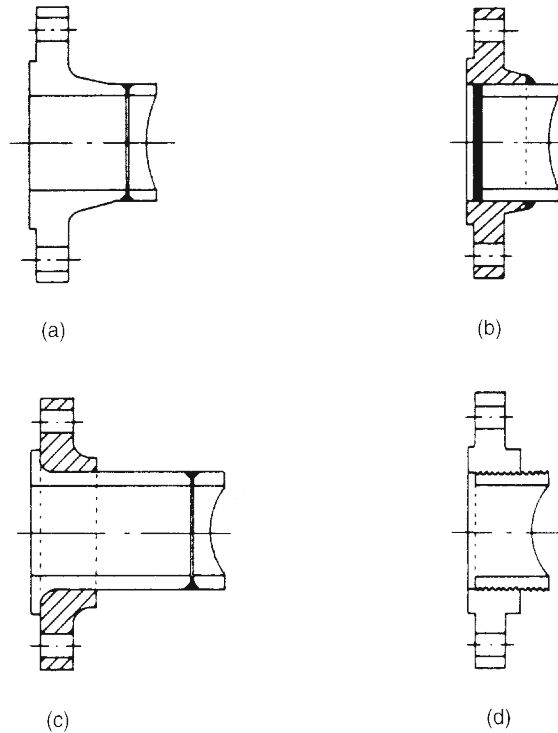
Flange types (a) Welding-neck (b) Slip-on (c) Lap-joint (d) Screwed
